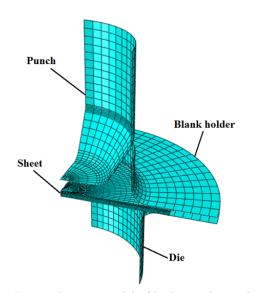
Finite element model of hydromechanical deep drawing of a conical cup.
